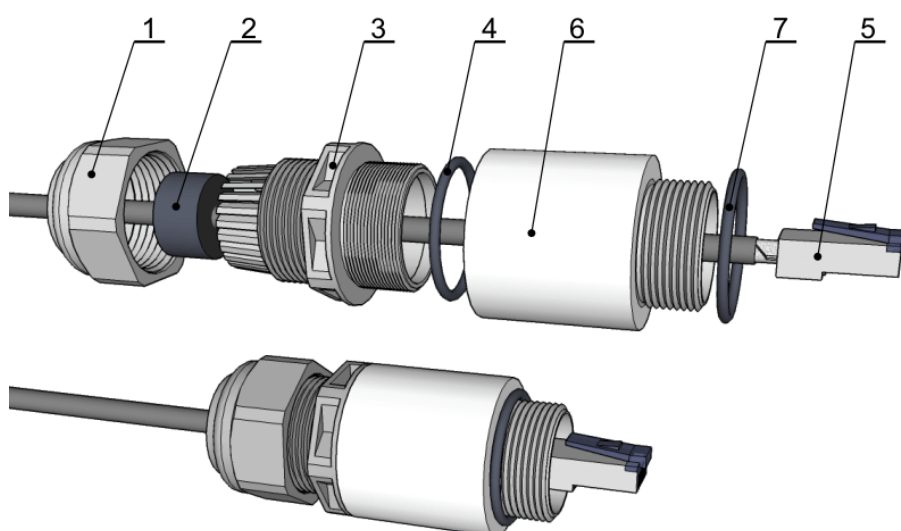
Assembly for a long connector, eg. with SFP-RJ45-FIN
